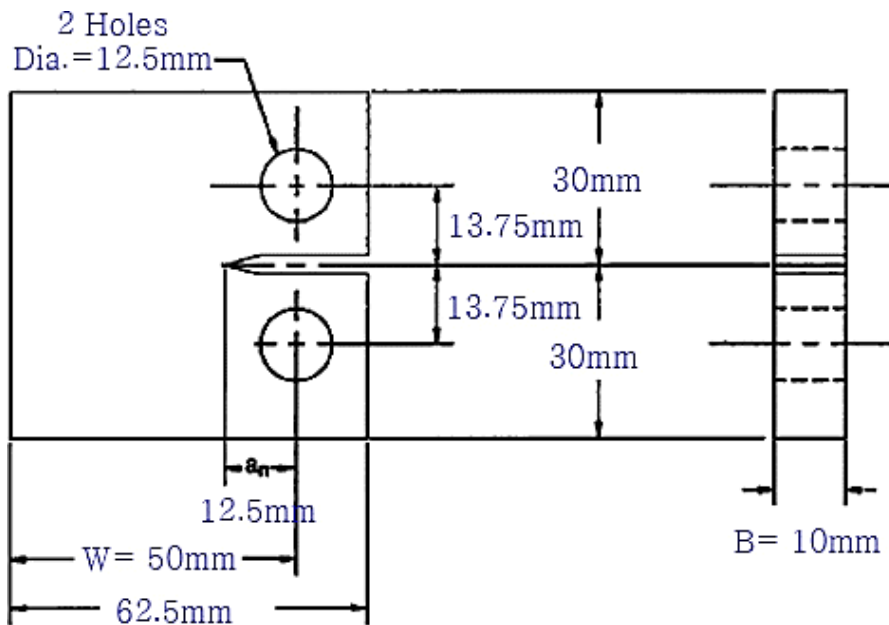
ASTM E647 for Fatigue Crack Growth Specimen
